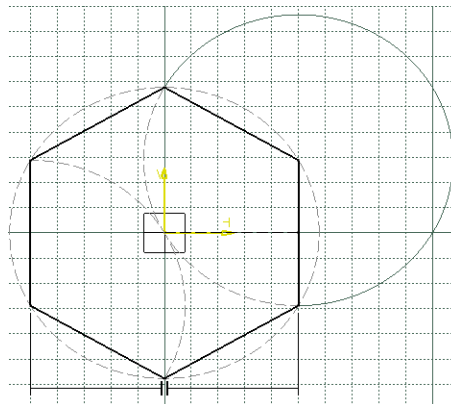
Hexagon drawn using the Hexagon tool
